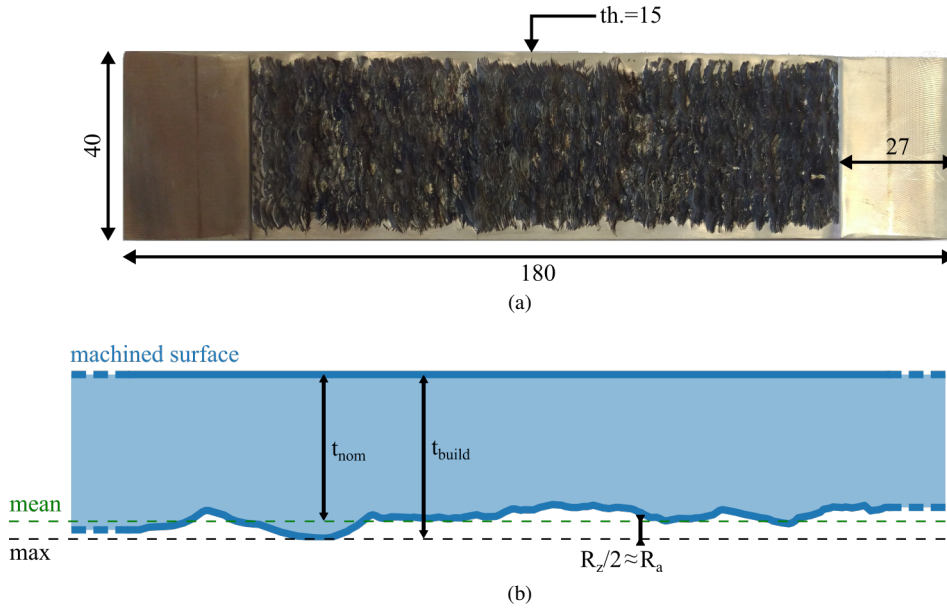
Test specimen dimensions in millimeters (a) and definition of the nominal thickness  $t_{nom}$  (b)
